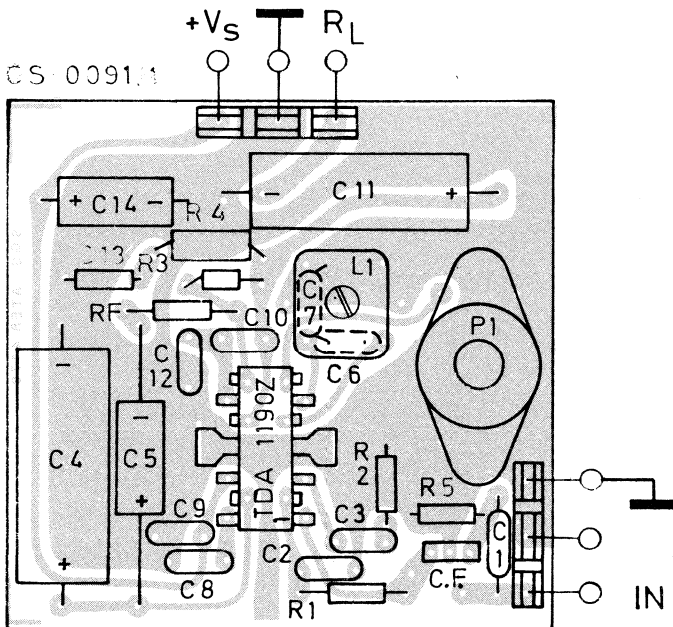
P.C. board and component layout of the circuit shown in Fig. 16
